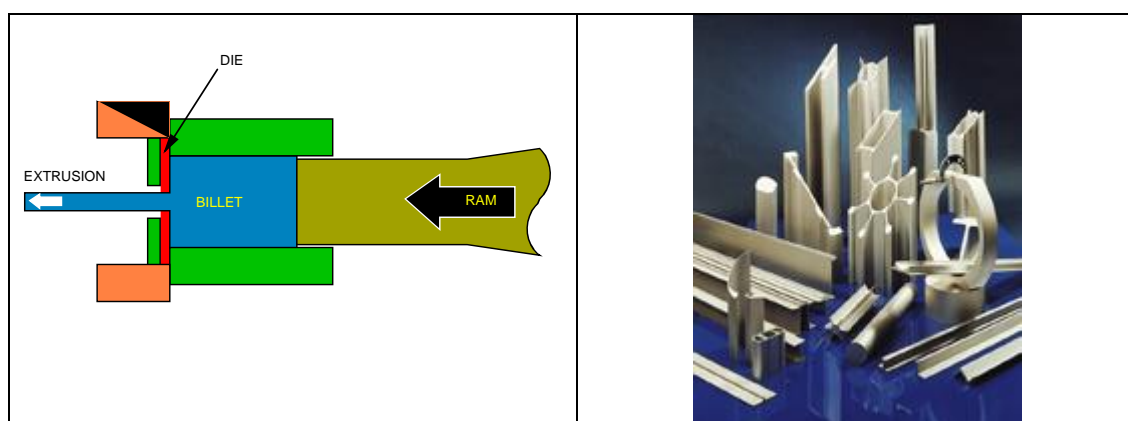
Extrusion process principle and some aluminium extruded products
